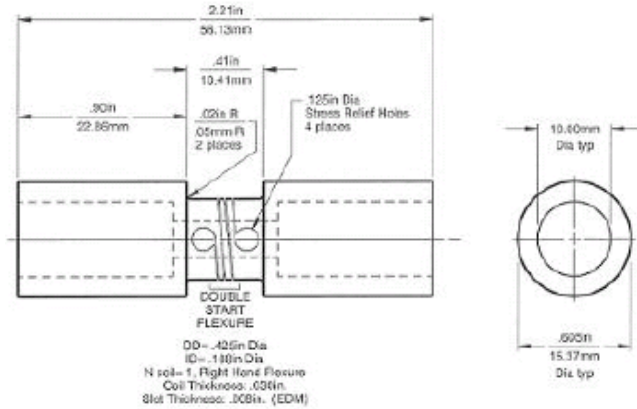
CAD drawing of Heli-cal, Inc. coupler
